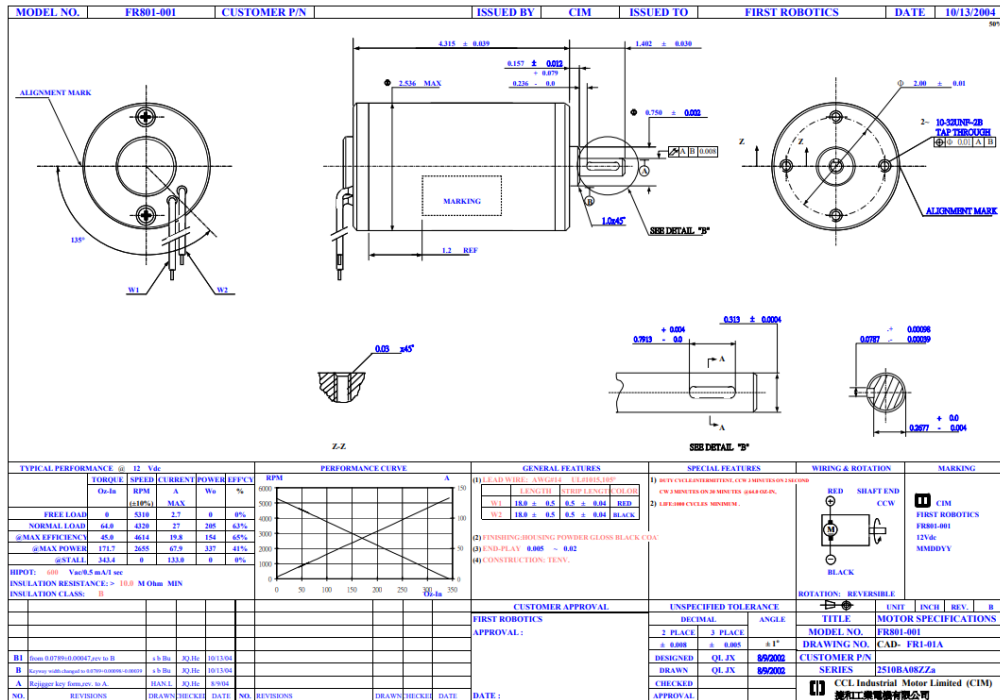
CIM Motor manufacturer specification sheet and component drawing [10]
